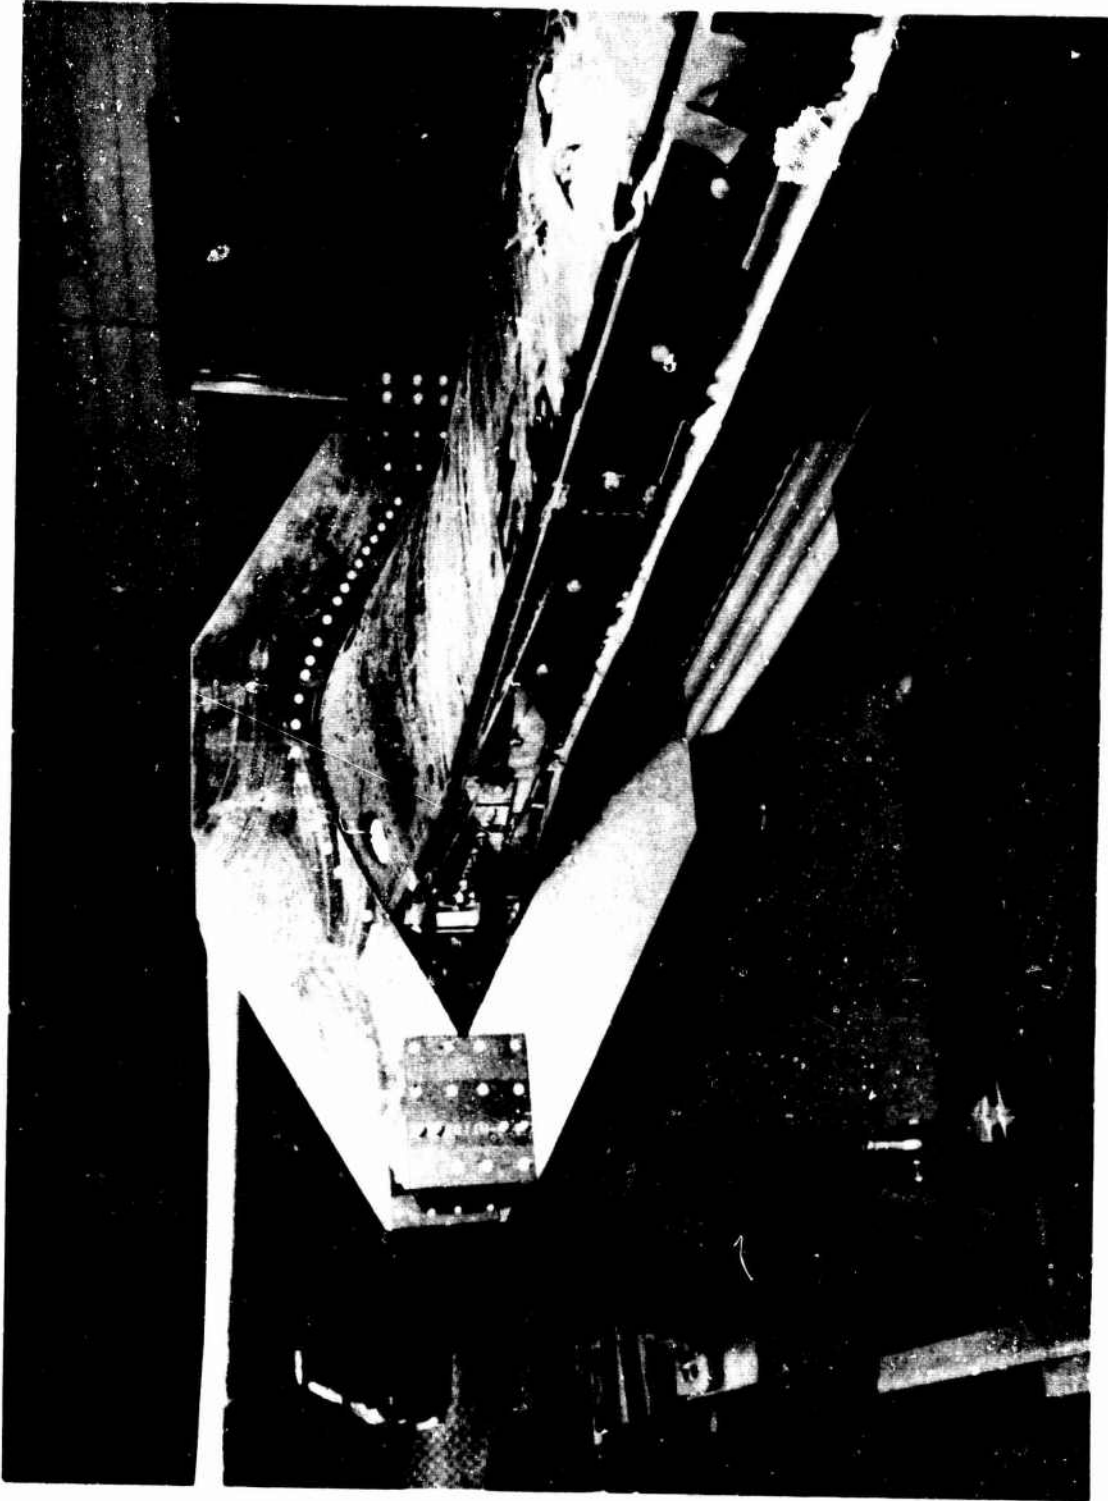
Blade Root-End Fatigue Test Fixture - Trailing Edge of Specimen
